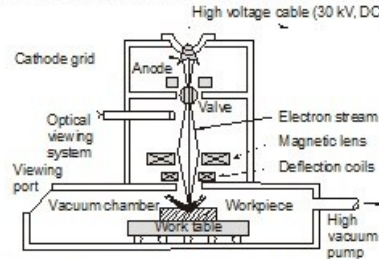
The electron-beam machining process. Unlike LBM, this process requires a vacuum, so workpiece size is limited to the size of the vacuum chamber
